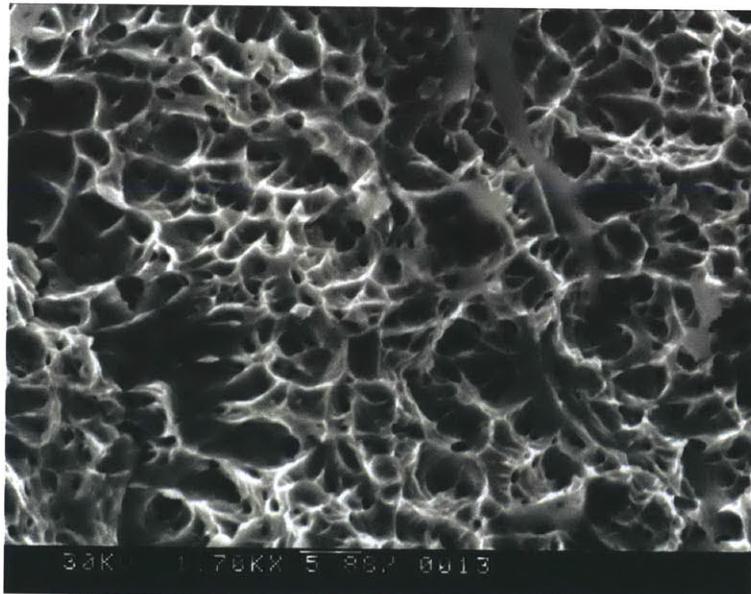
Ductile fracture surface typical of tensile tests.
